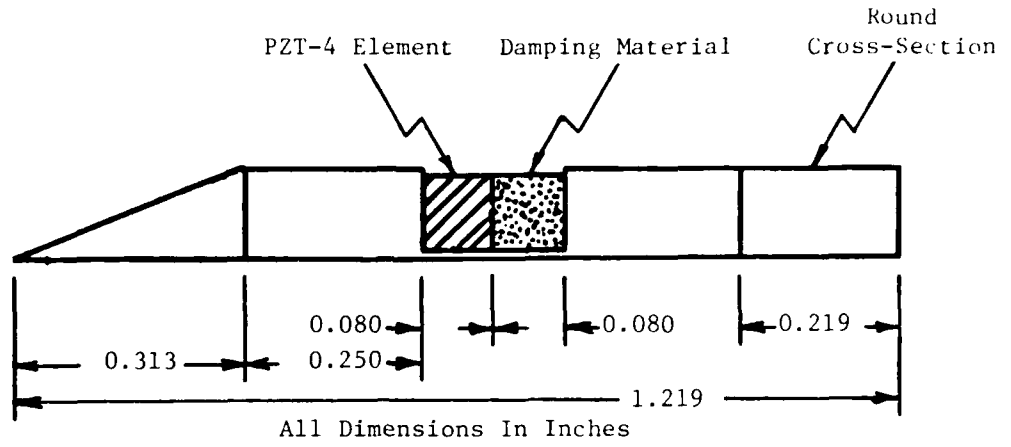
WEDGE-SHAPED RECEIVER DESIGN
